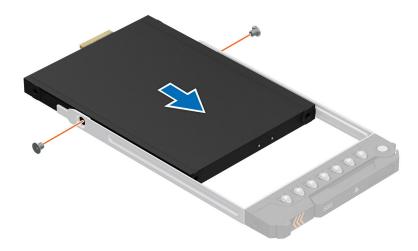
Installing the EDSFF E3.S drive into the drive carrier
